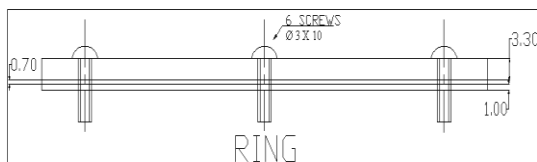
Placement of screws for metal ring, diaphragm and gasket
